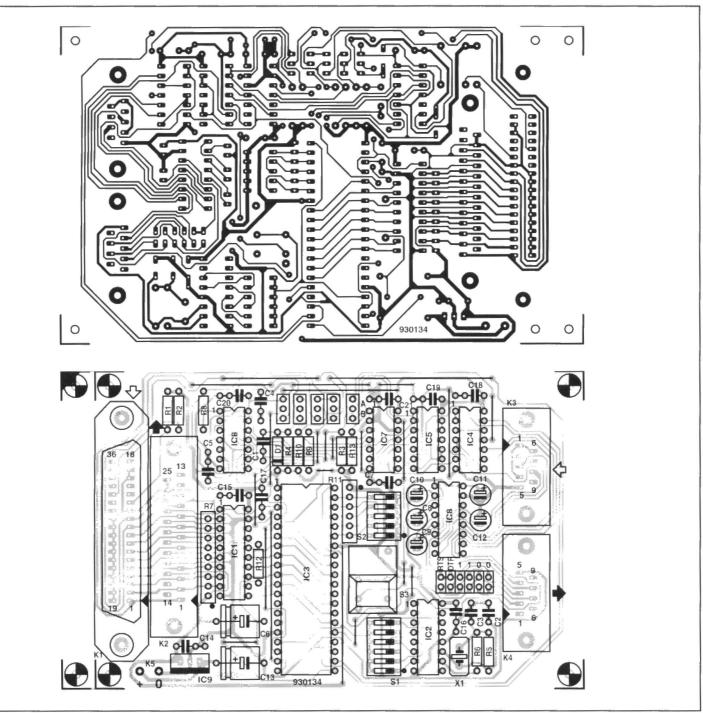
Track layout and component mounting plan of the printed circuit board designed for the converter.
